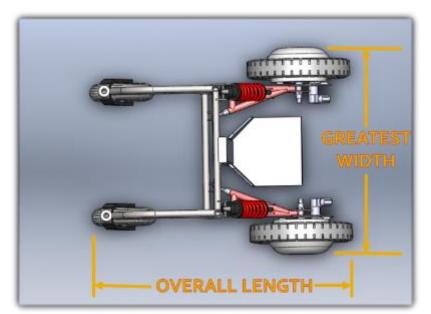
TOP VIEW OF PROTOTYPE WITH OVERALL LENGTH AND GREATEST WIDTH DIMENSIONS LABELED.
